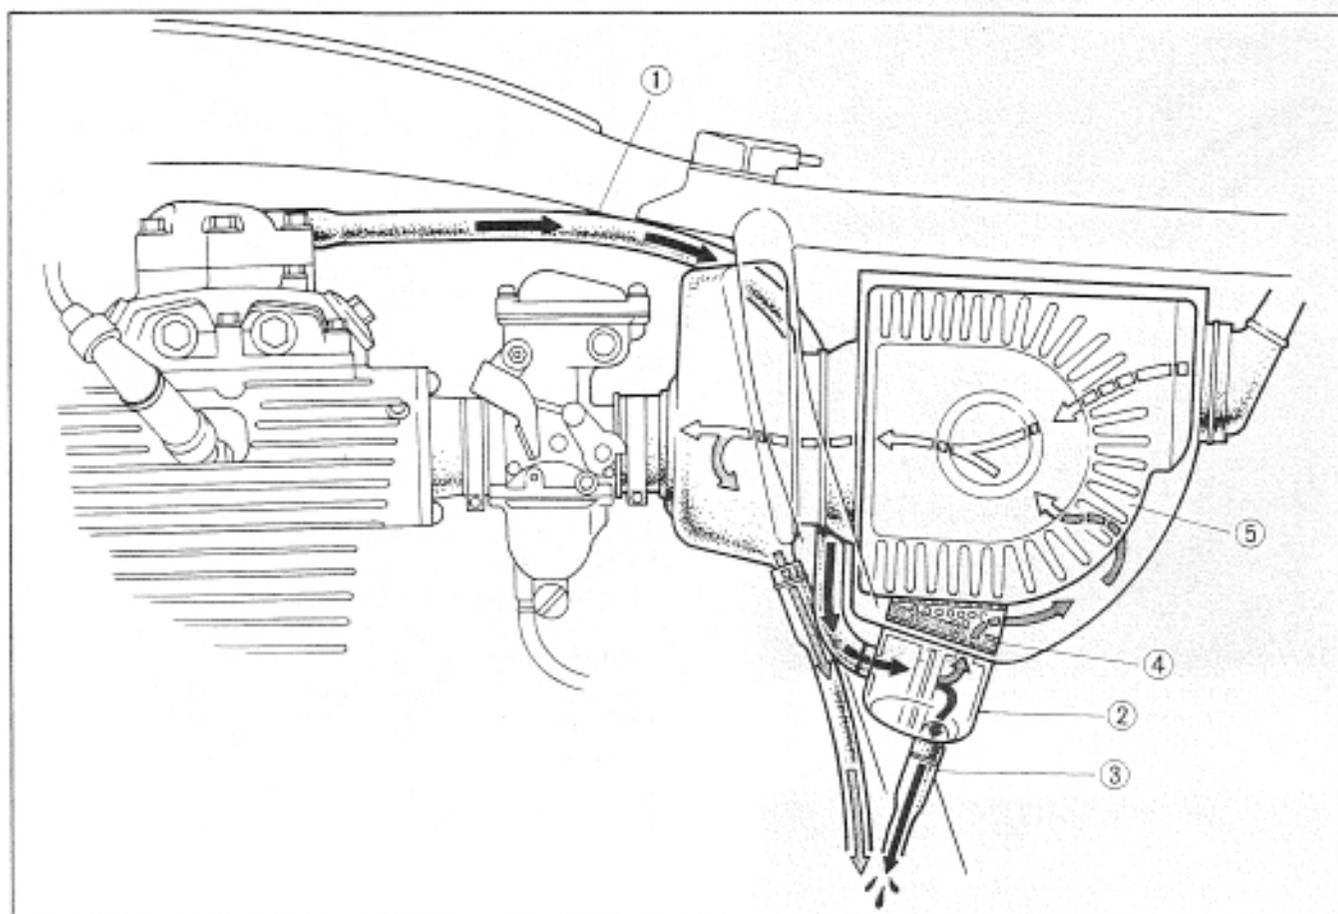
① Breather tube ③ Oil drain tube ③ Air cleaner element
